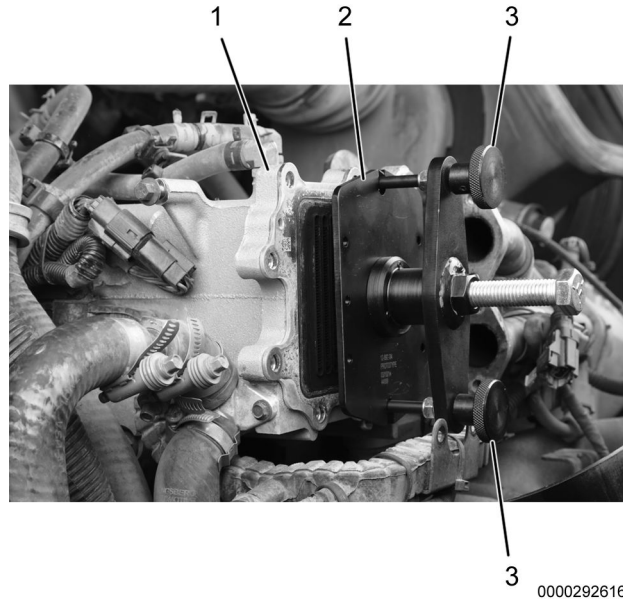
LT EGR Core Puller Thumbscrews – LT EGR Cooler Core Removal.
